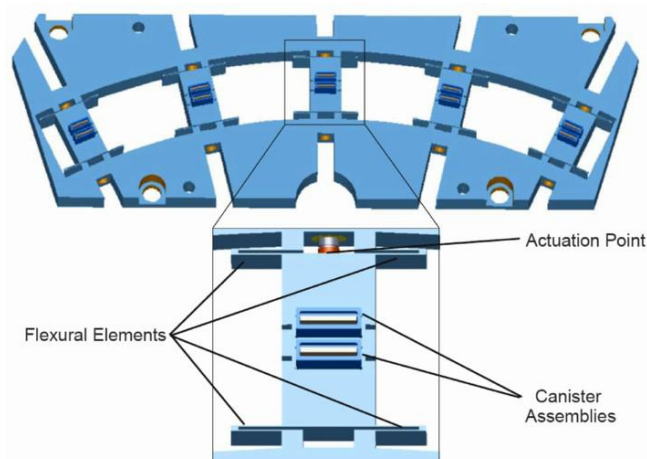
The new alignment strut frames used with the OAP2 housings. The design is capable of aligning and bonding two pairs of segments in the OAP2 housings.
